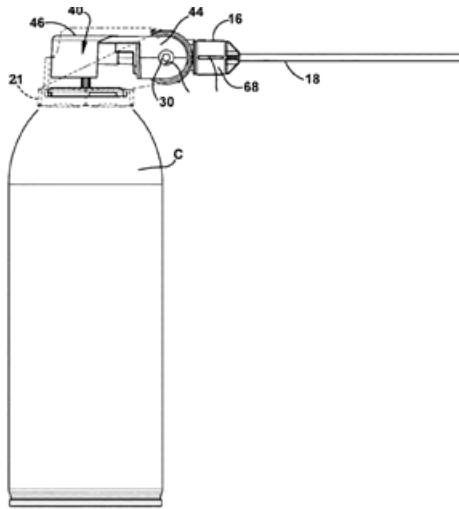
illustrates a horizontal position of an outlet tube (18) supplied by a rotatable valve assembly.
